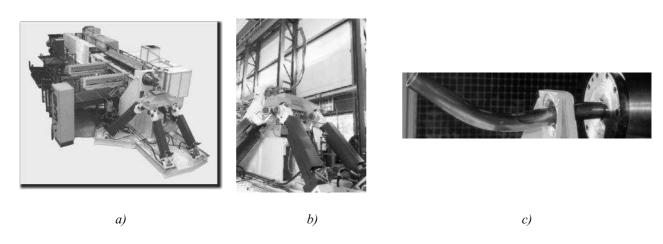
Bending machine type HexaBend with parallel kinematics, where a – general view of bending machine, b – view of parallel structure with die, c – result of bender operation [8]
